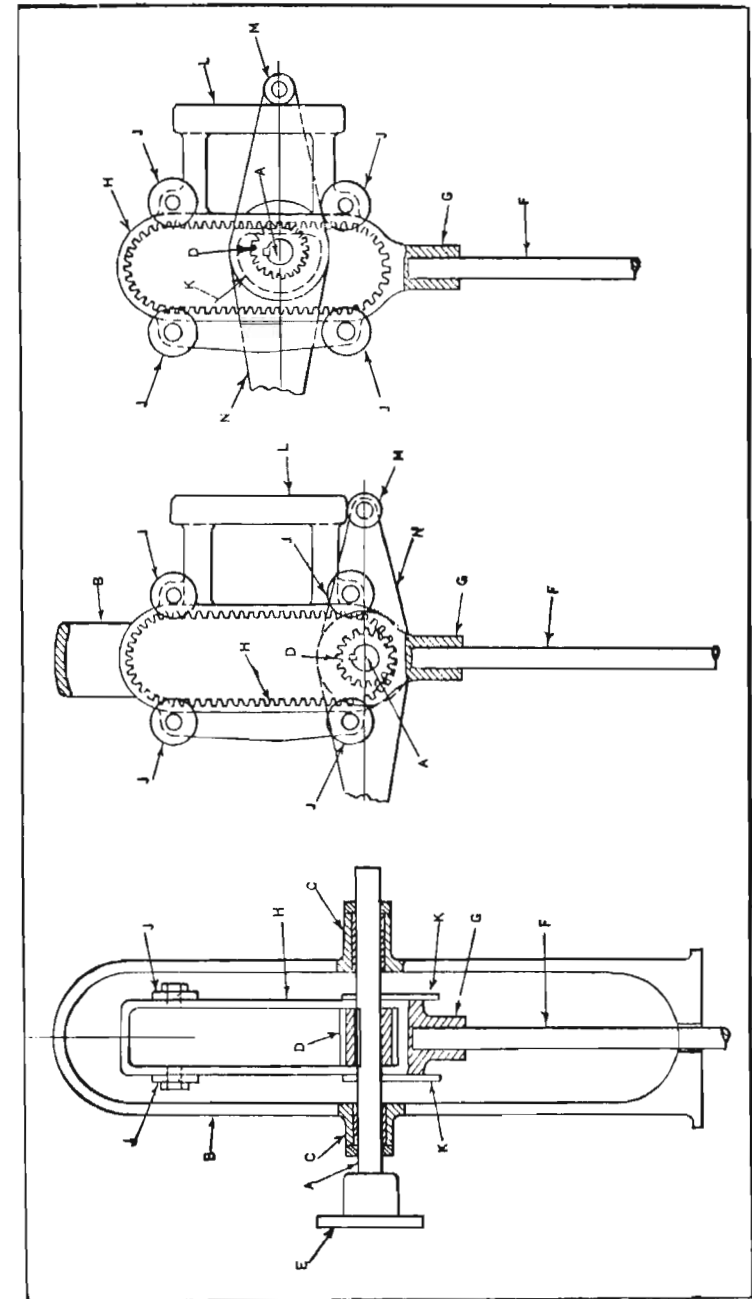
Windmill Pump Drive for Obtaining Long Stroke and Efficient Windmill Speed
